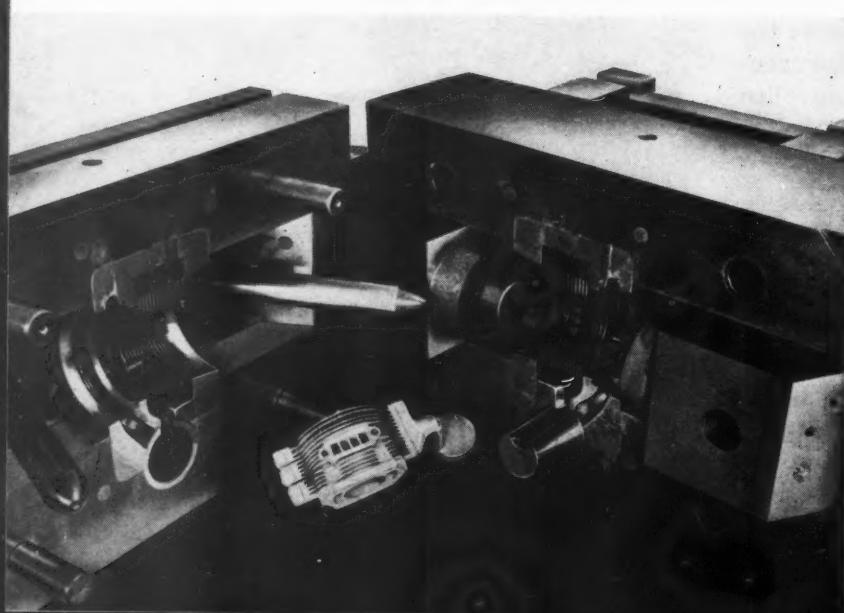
Die-casting die of insert type used in casting one-piece cylinders and cylinder heads with cooling fins
